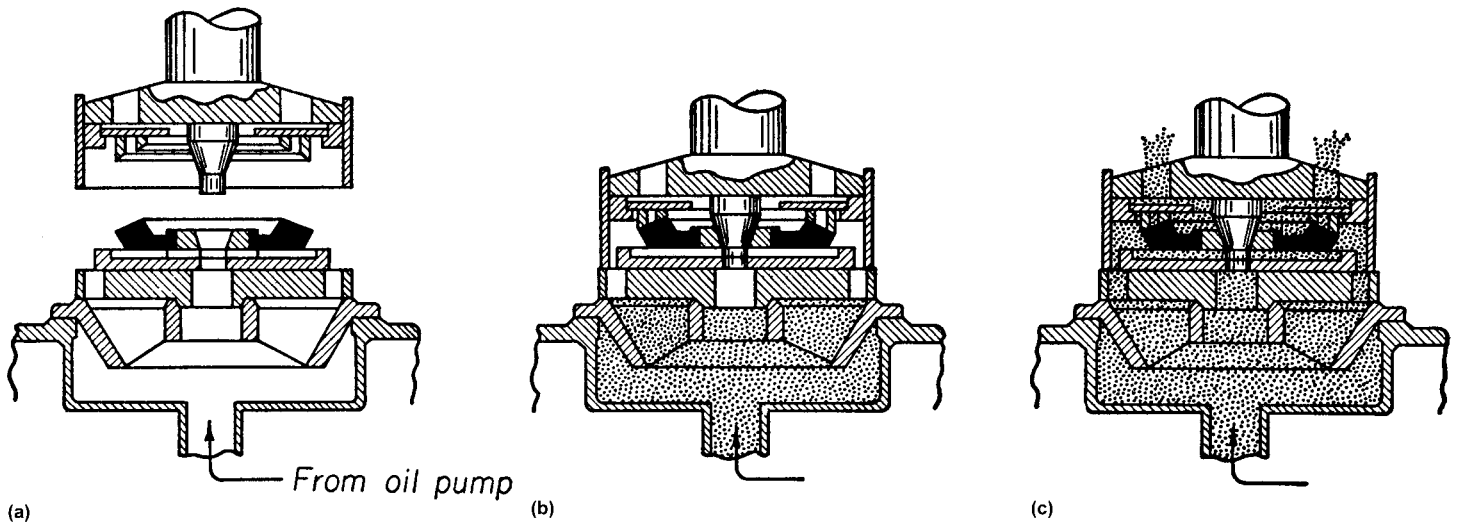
(a) A hot gear placed into position on the lower die assembly is ready for press quenching. (b) Lowering the center ram and the upper inner and outer dies to make contact with the part. (c) Starting the timing cycle; the oil flow is initiated into the quenching chamber and around the part. Source: Ref 2
